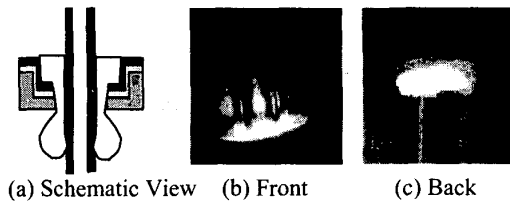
View of the assembled rubber O-rings and tube structure (a) Schematic drawing (b) front side (c) back Side
